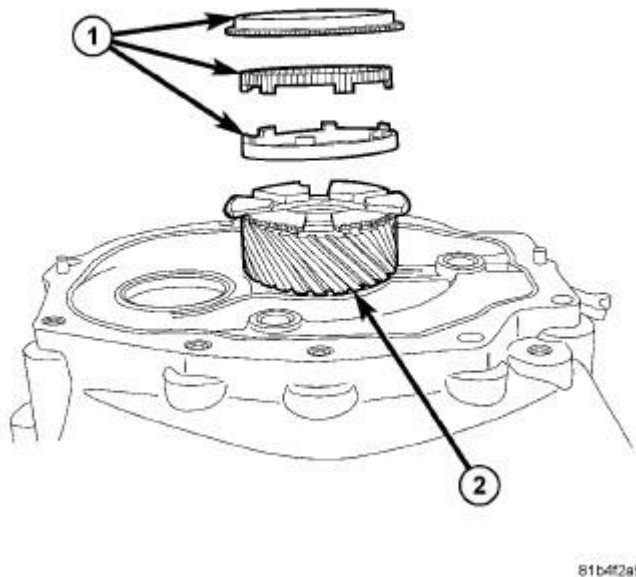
INPUT SHAFT SYNCHRO RINGS
